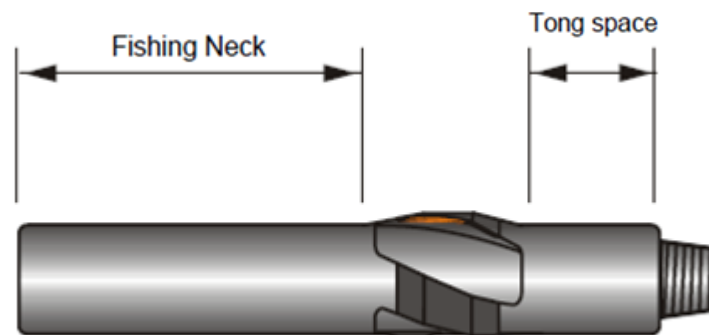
Location of the stabilizer blades on the tool body considering enough space for fishing tools to interlock with the stabilizer and a tong space for the rig tongs during make-up and break-out of connections. (modified after Baker Hughes 2015)
